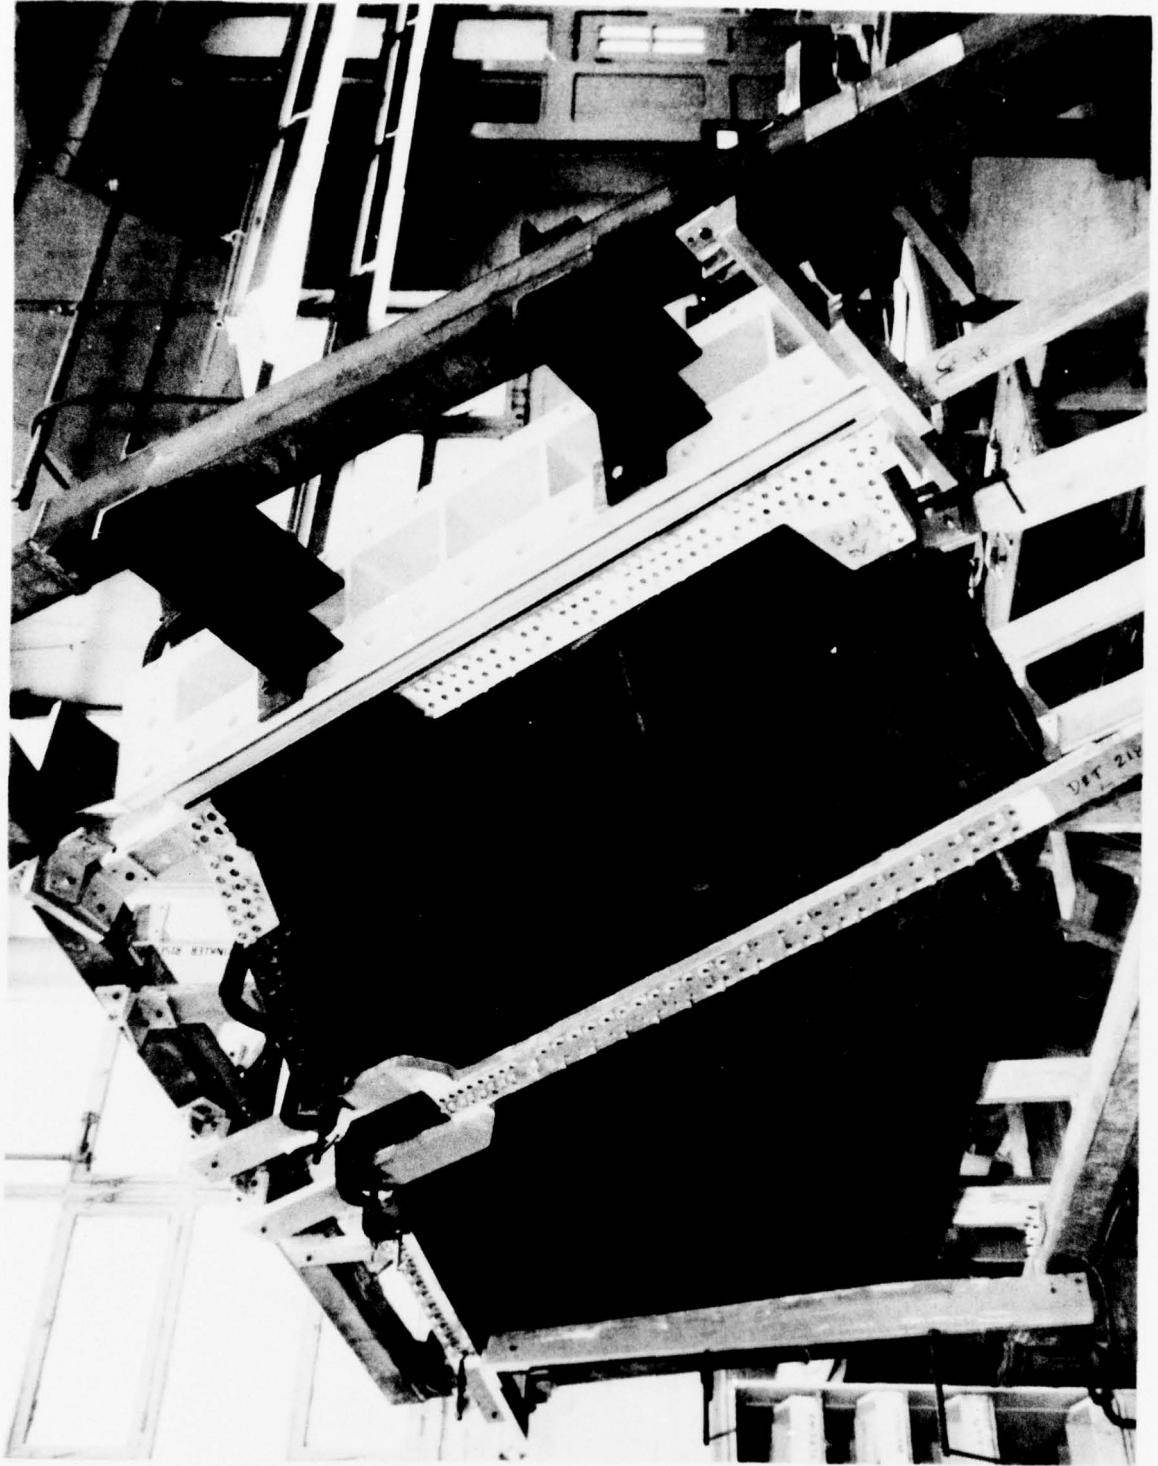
COMPOSITE WING DETAIL PARTS IN ASSEMBLY/DRILL FIXTURE
